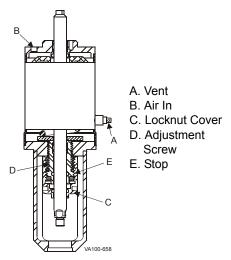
4", 5" and 6" Air-to-Lower, Adjustable-Spring
